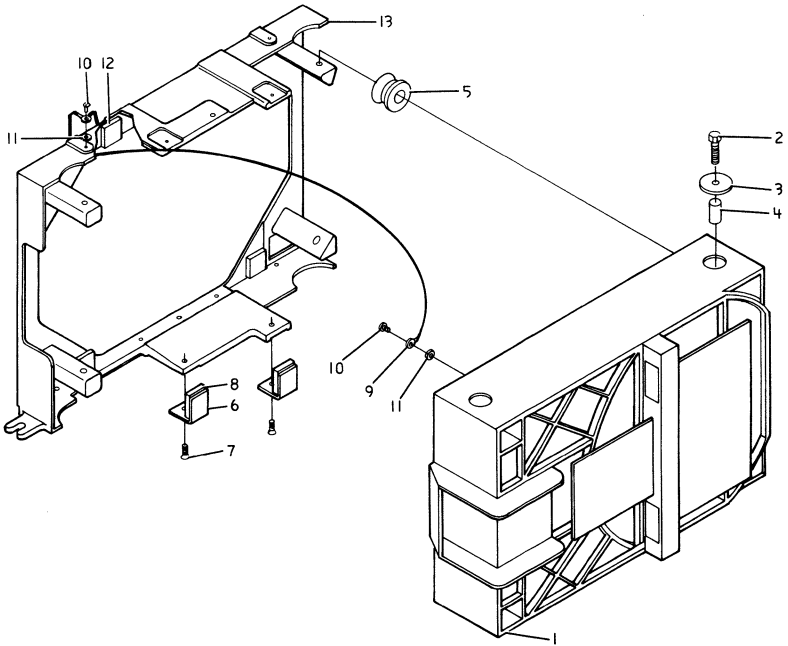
FIXED DISK MOUNTING ASSEMBLY
